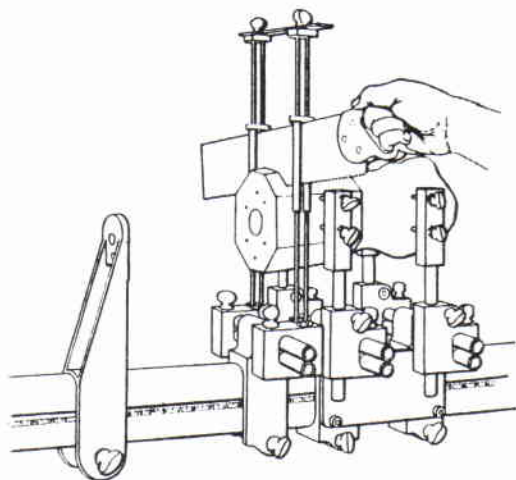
Making saw cut on bottom of socket block. Remove not more than $\frac{1}{4}$ in. at thinnest point about periphery.
